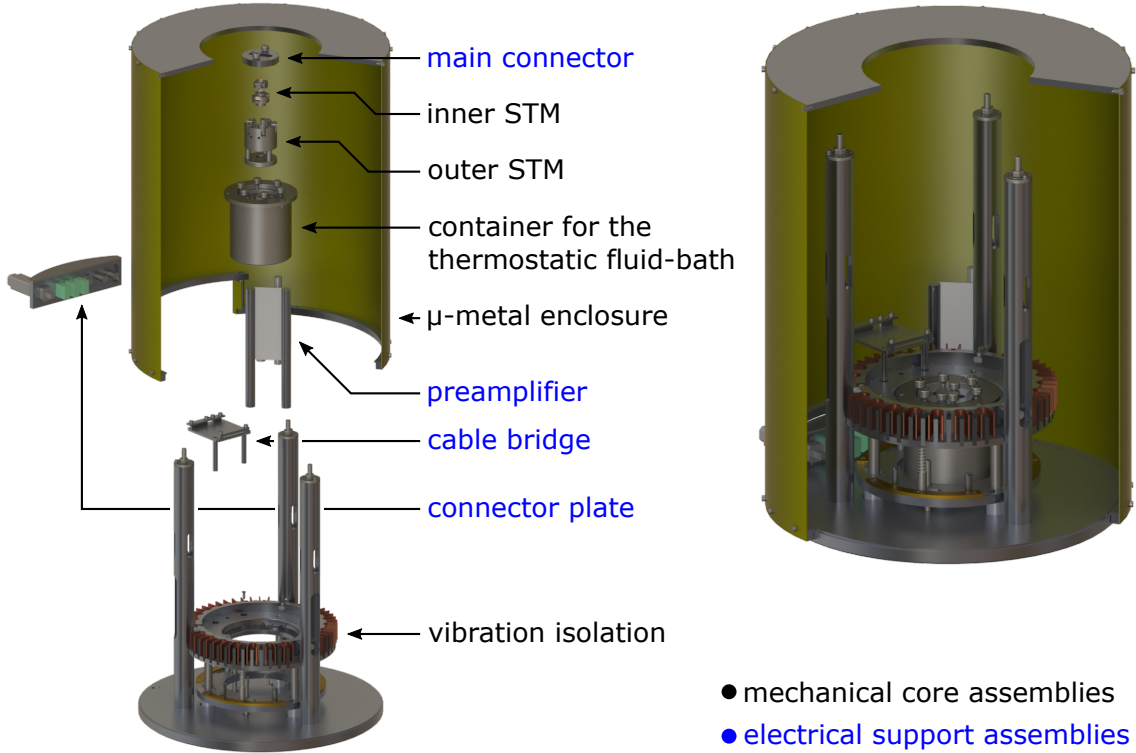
Explosion view of the main assemblies of the I-STM (μ -metal enclosure in sectional view) categorized in mechanical core and electrical support assemblies. The mechanical core assemblies are all described in this section while the electrical support assemblies and the wiring are all explained in section 6.5
